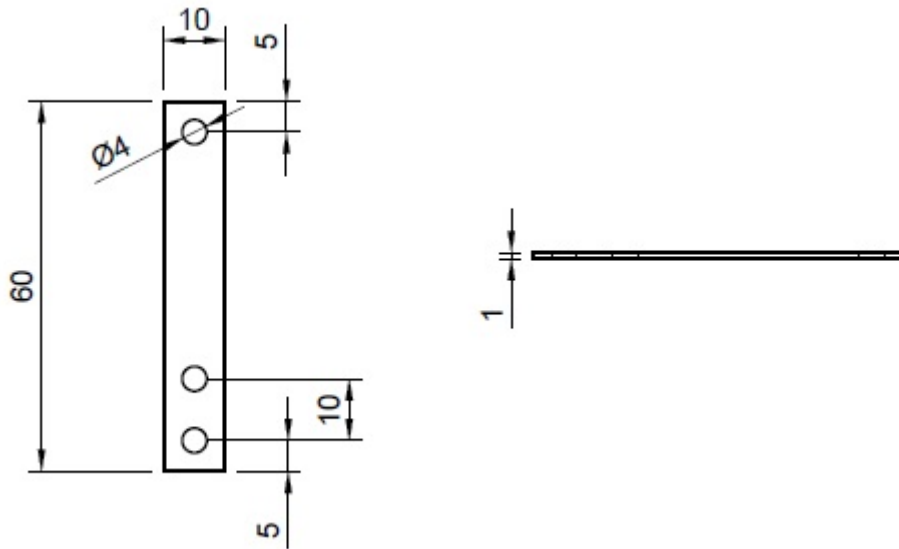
Drawing of the rectangular stainless steel 316 plate with 10x60x1mm detentions. The top 4mm hole is used to mount the U shaped part responsible for holding the main heater part. After adjusting the length, this part is fixed with two M4 nuts and bolts to the part shown on Fig. 3.15
